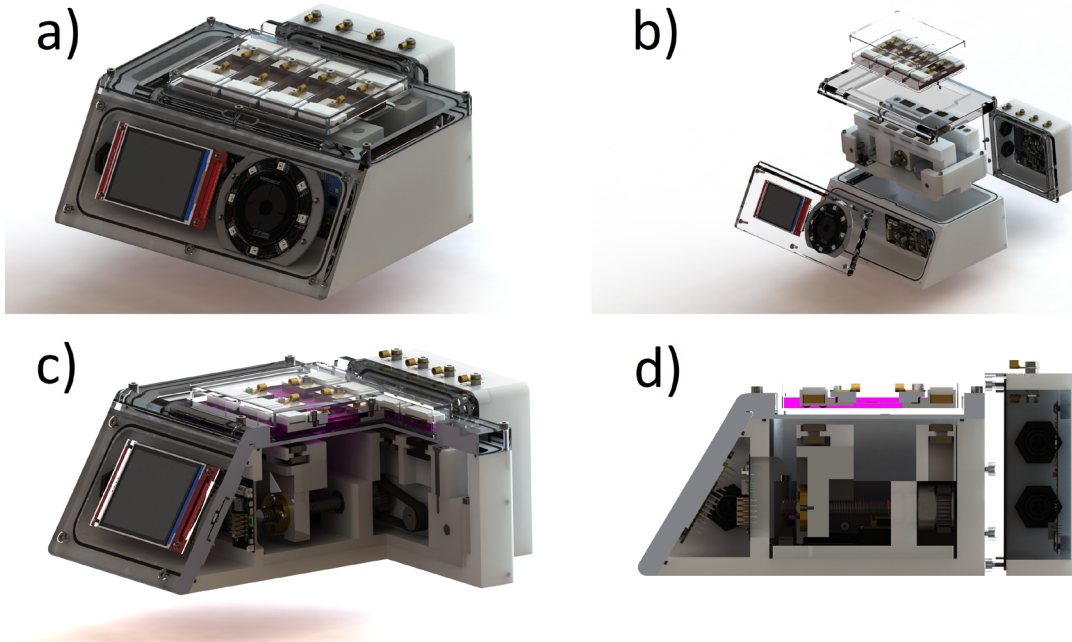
a) Bioreactor assembled with tissue plate isometric view, b) disassembled with all main electric and mechanical components, c) L-cut view and d) sagittal cut view.
